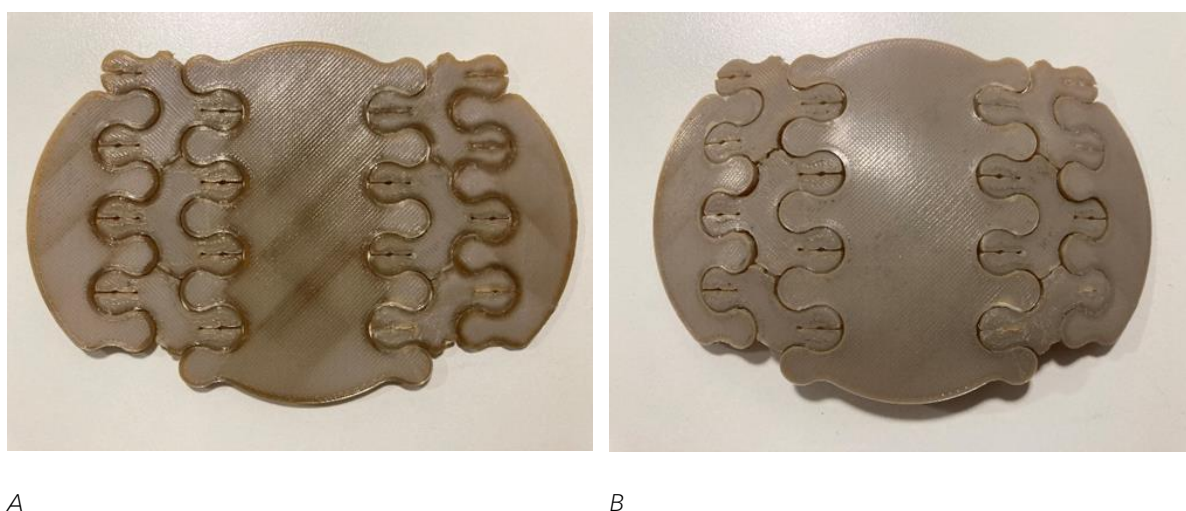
The 3D printed PEEK Armadillo set flat (A) and after post-processing and final assembly (B) into the PEEK prototype of the modular cranial semi-PSI.
